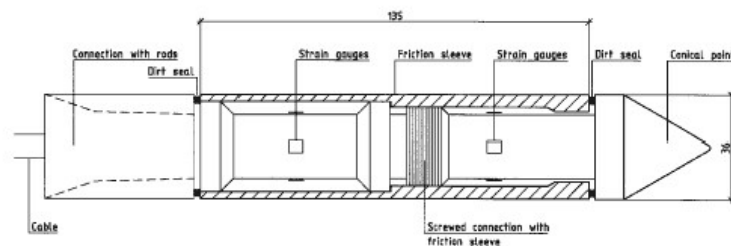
Electrical friction cone, Source: Guide to cone penetration, J J M Brouwer, Lankelma
